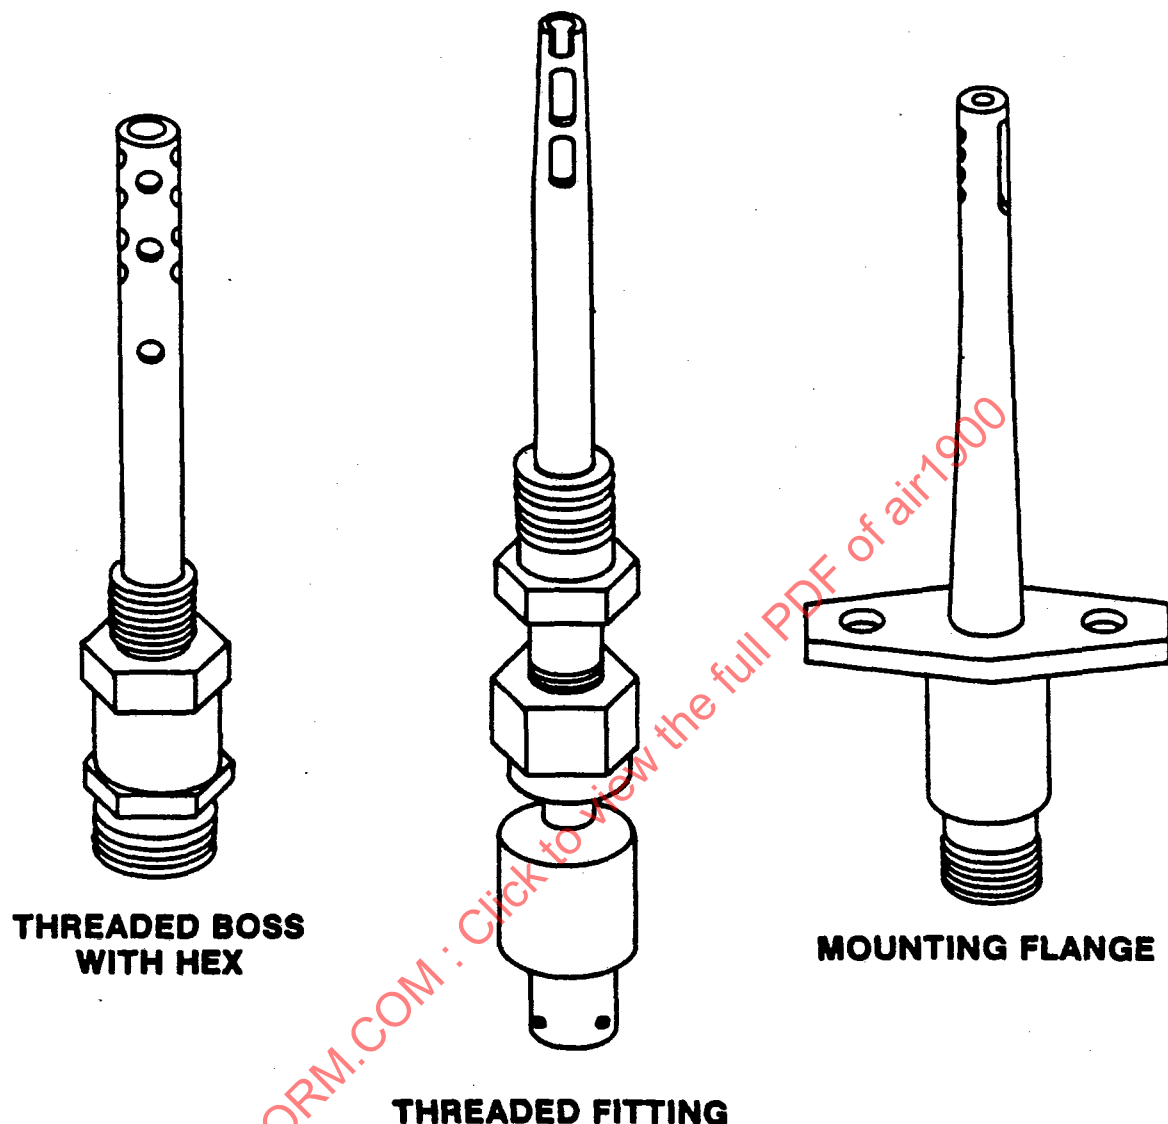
Means of Attachment to Engine Mounting Surface
